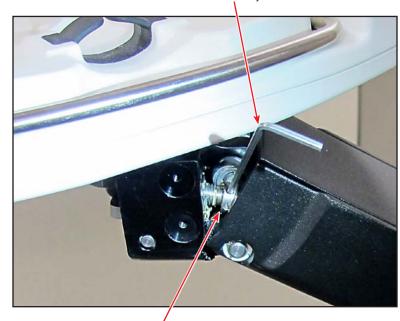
Washers and Bearings used to attach Tray Assembly to the Tray Arm
